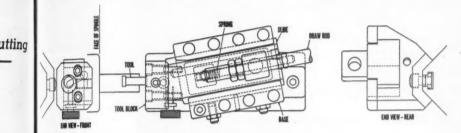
Drawing of Under Cutting Fixture for Use on Automatic
